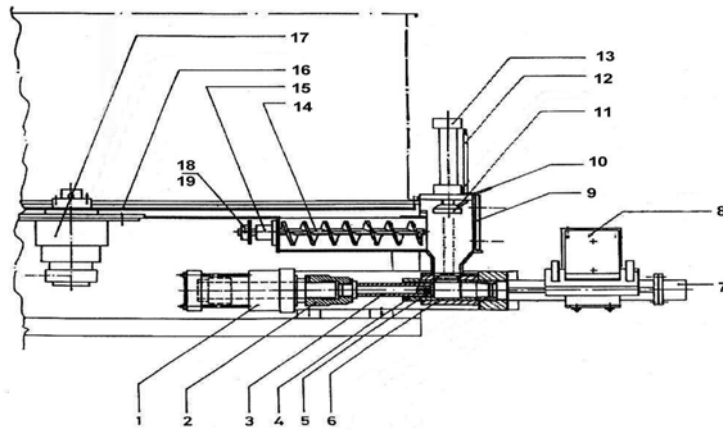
Operating principle of the commercial press machine (SP 45/12)
